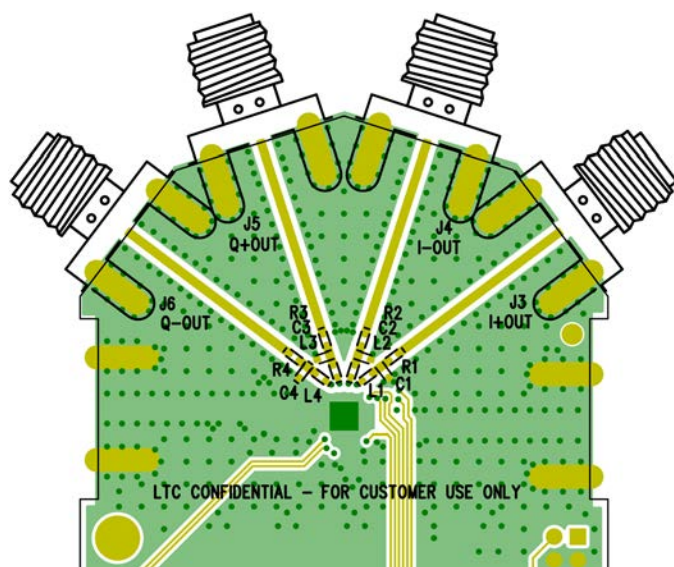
Alternate Layout of PCB with Baseband Outputs on the Backside
